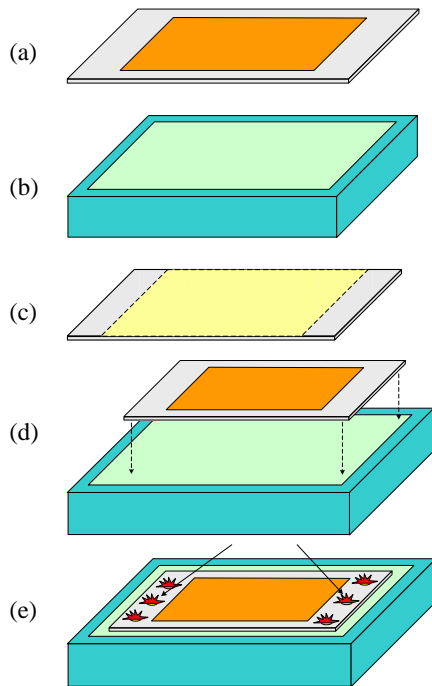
Schematics of bonding procedures (a) pre-attach metal foil on stainless steel base (b) apply activator on substrate (c) apply adhesive on back of steel foil (d) align and attach steel base onto steel substrate (e) spot welds on both ends
